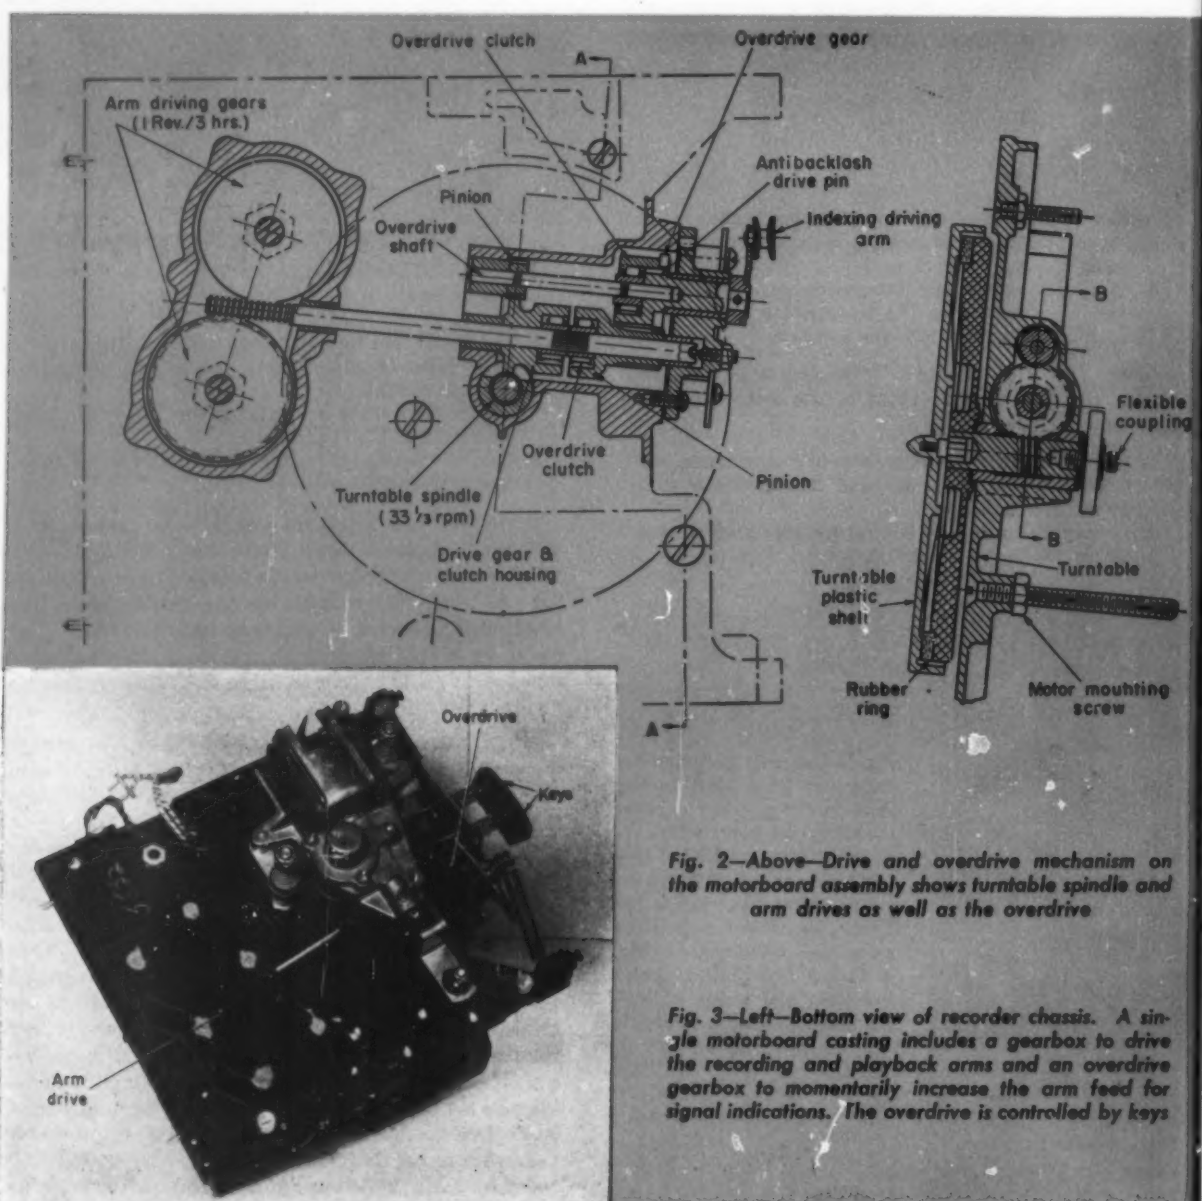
Above—Drive and overdrive mechanism on the motorboard assembly shows turntable spindle and arm drives as well as the overdrive
